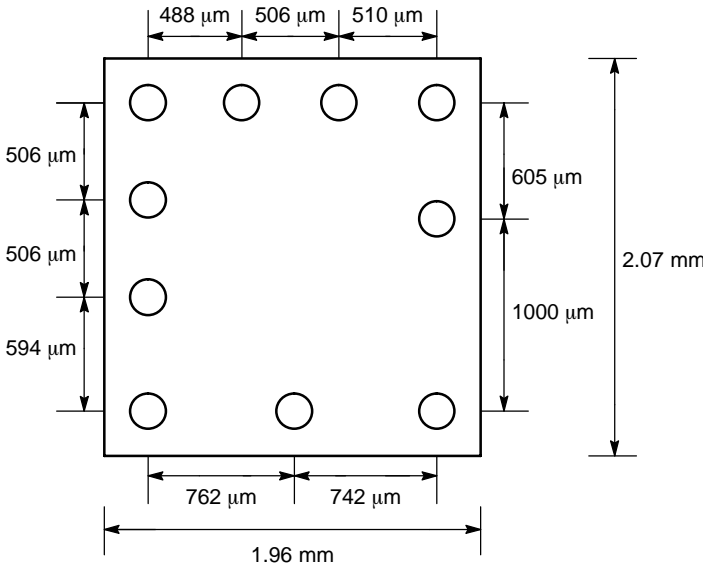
Flip Chip Dimensions and Solder Bump Locations, Bump Side Up
